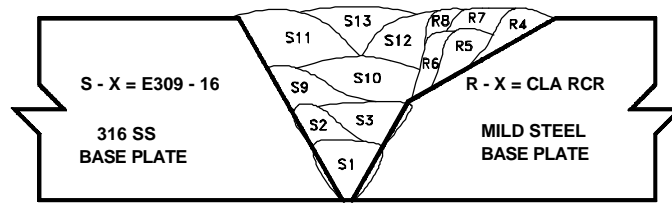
Bead Sequence for Weld Procedure Test
